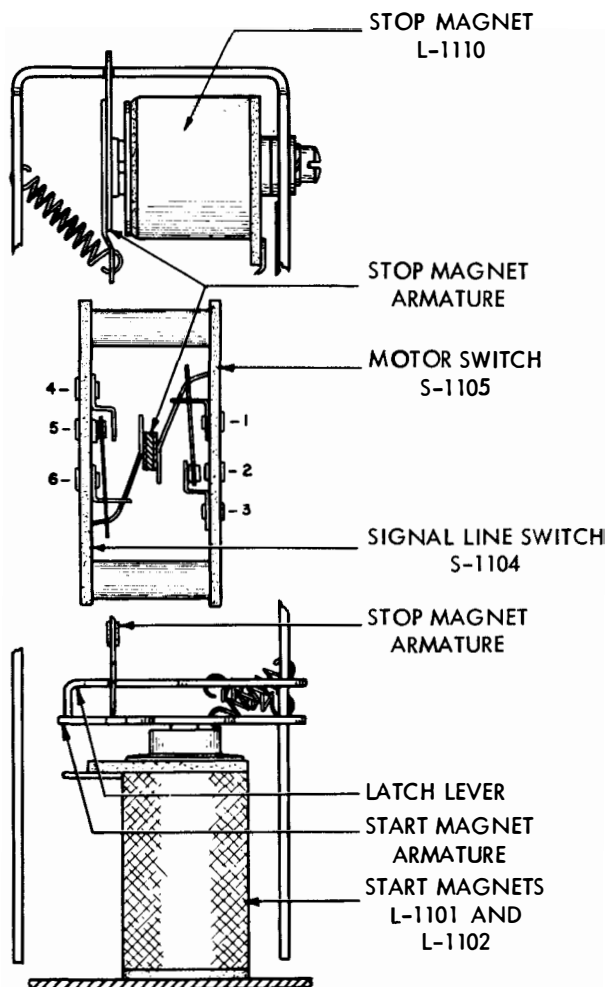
Electrical Motor Control Mechanism, Stop Position
